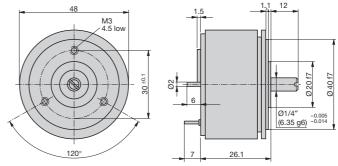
KINAX 2W2 with special drive shaft at front and at rear. At front: Ø 1/4", length 12 mm. At rear: Ø 2 mm, length 6 mm.
